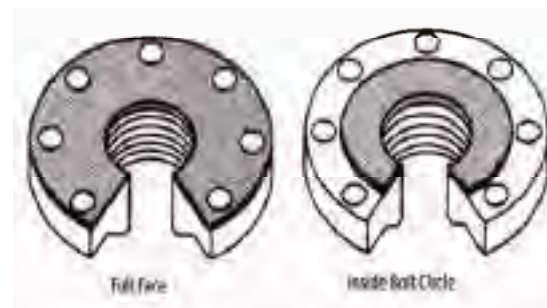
Full Face & Inside Bolt Circle Images
